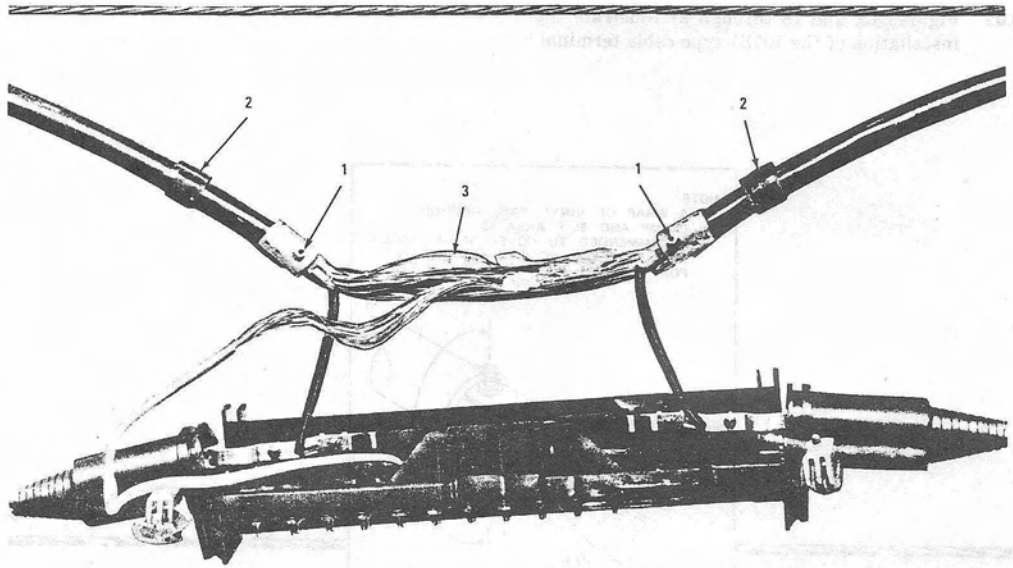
Step 5—Completed Installation (105A-Type Cable Terminal)
